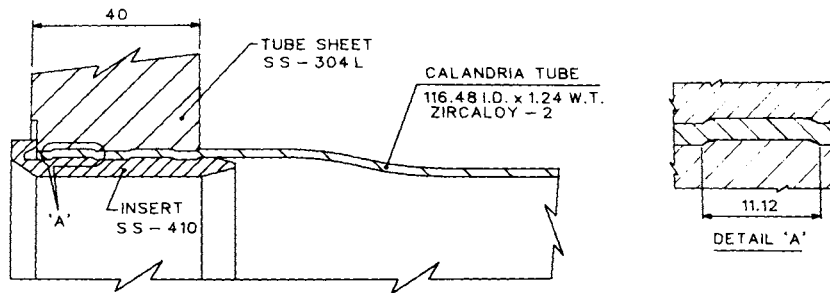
Details of calandria tube rolled joint. All dimensions are in mm.
